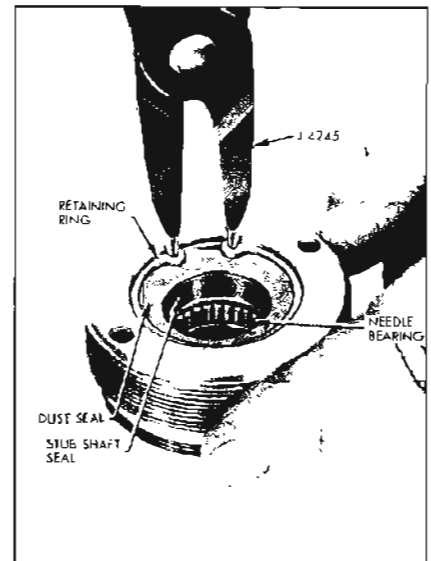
Removing Stub Shaft Seal Retaining Ring
